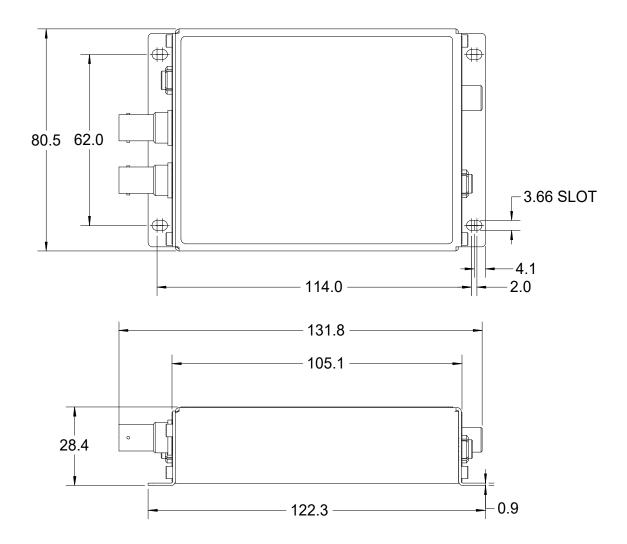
CR10 case plan and side views (SHV connectors). Dimensions mm.
